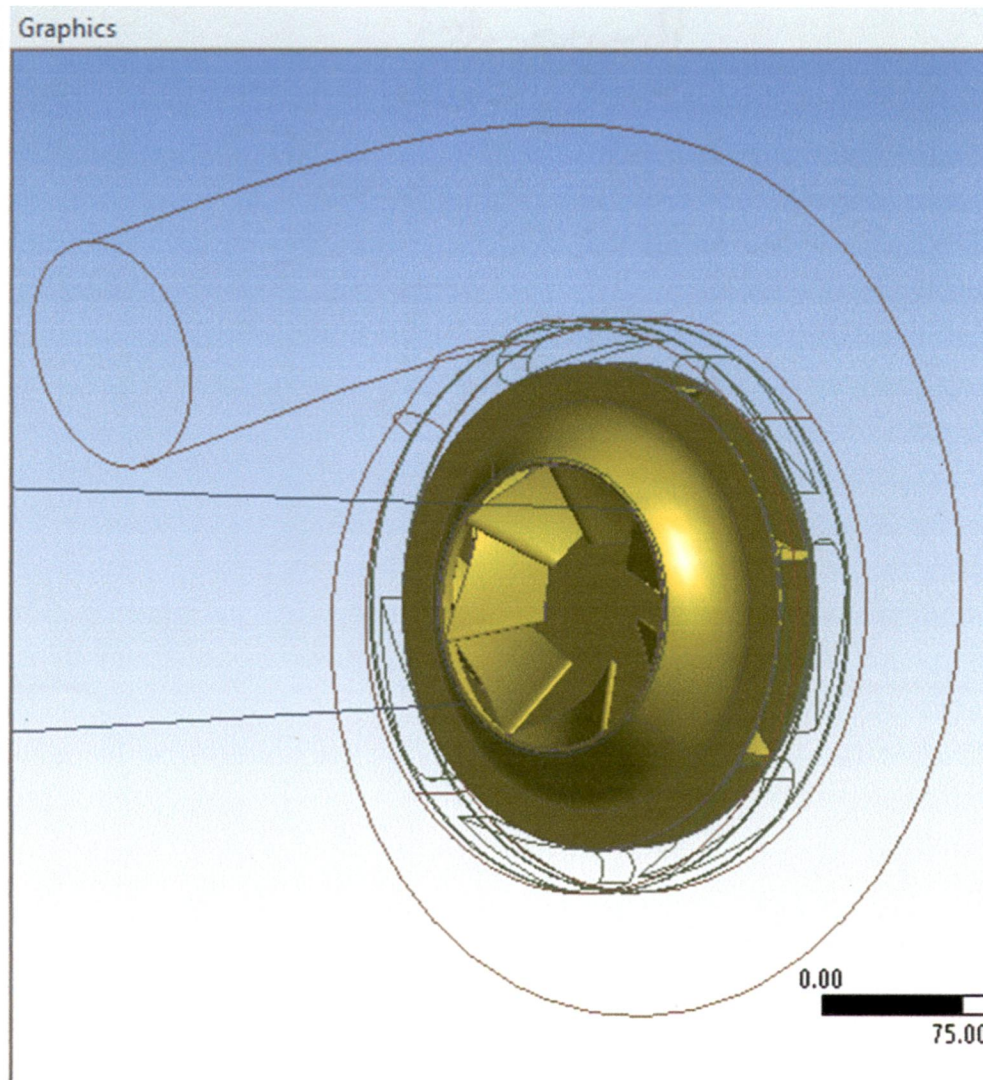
Wireframe view of assembly of modified PAT (highlighted impeller)
